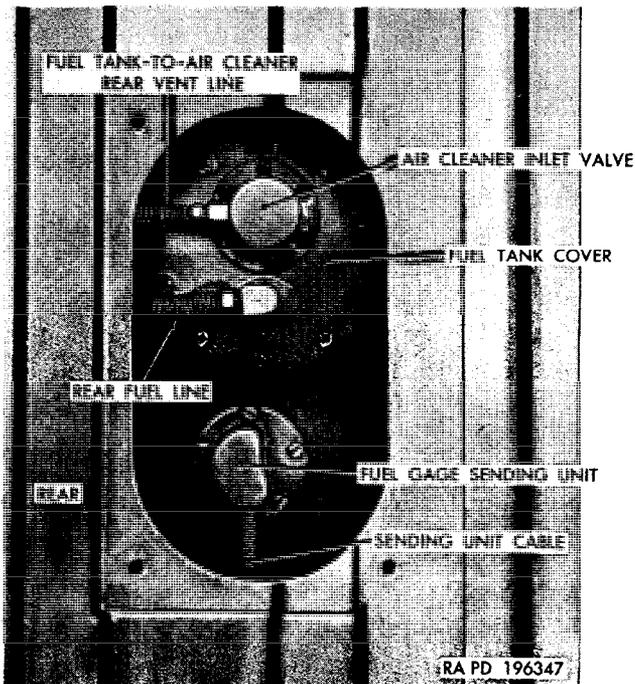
Fuel tank cover, air cleaner inlet valve, and fuel gage sending unit.
